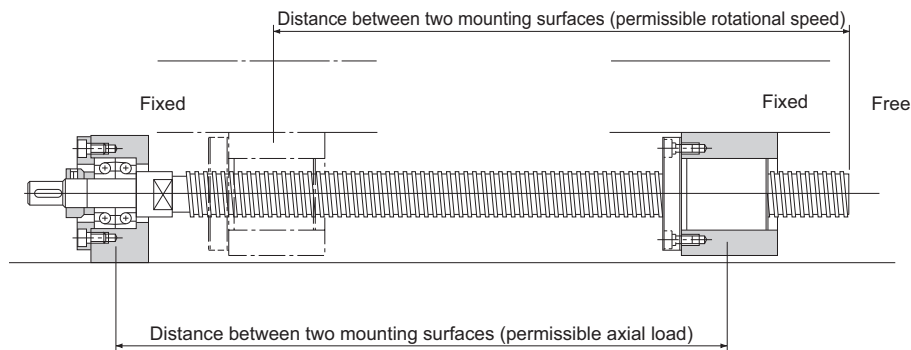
Screw Shaft Mounting Method: Fixed - Free
